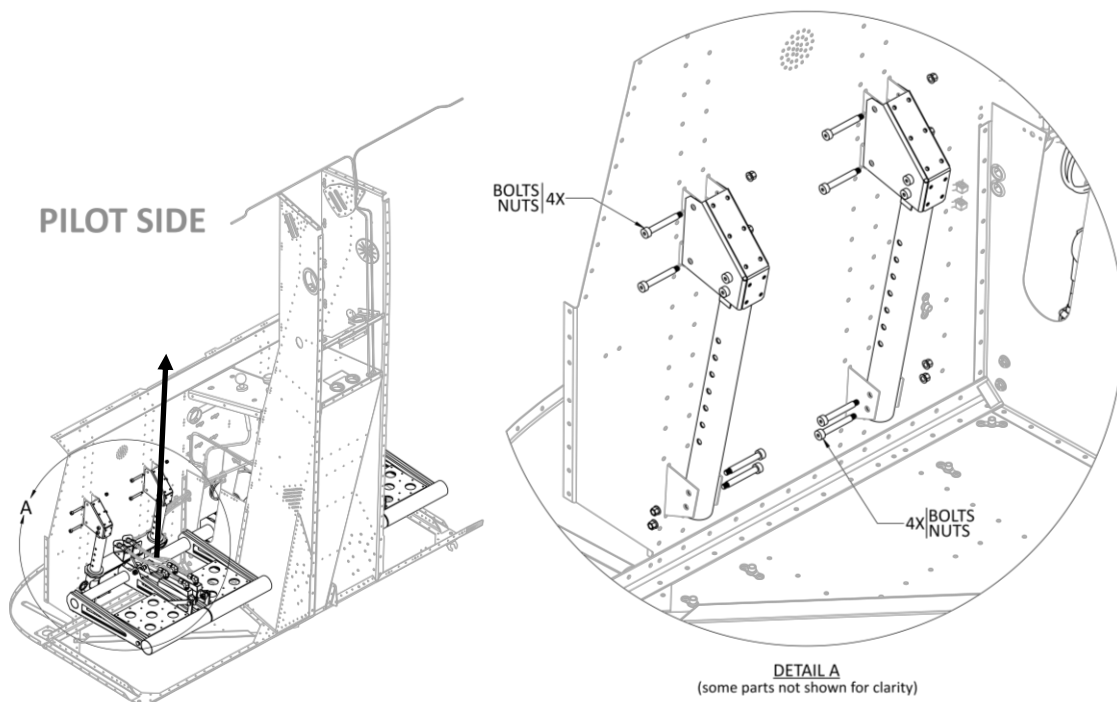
Rudder pedal bracket removals with rudder attachment bolts in Detail A.
